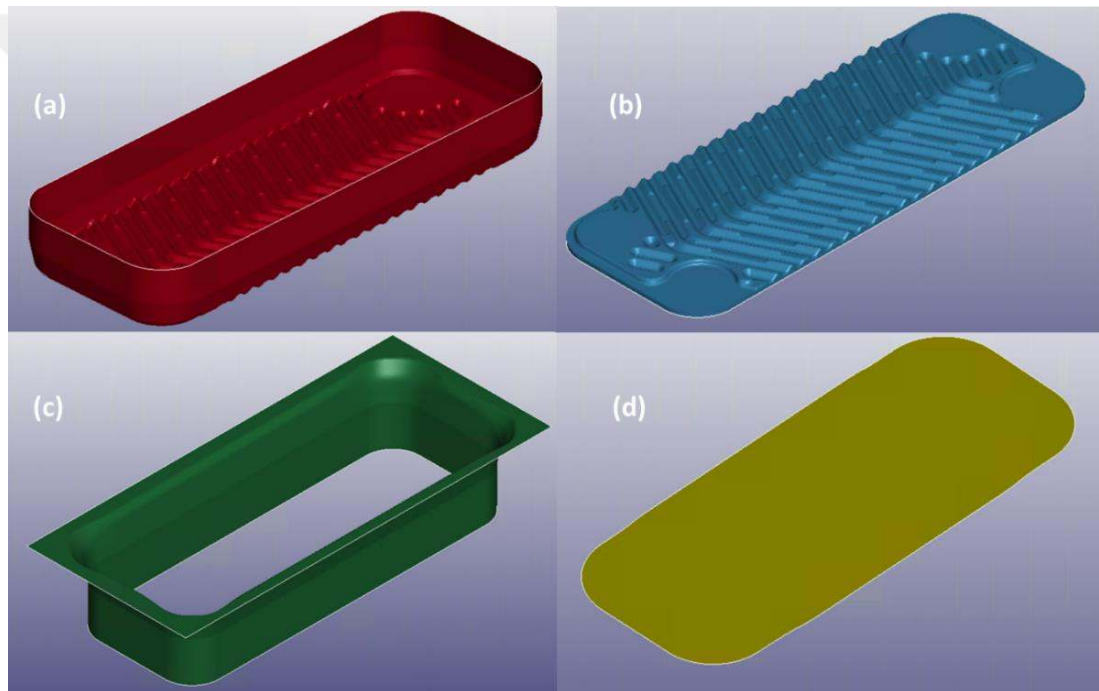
Components of the forming process in the C-PHE production; (a) the punch, (b) the die, (c) the blank holder, and (d) the blank.
